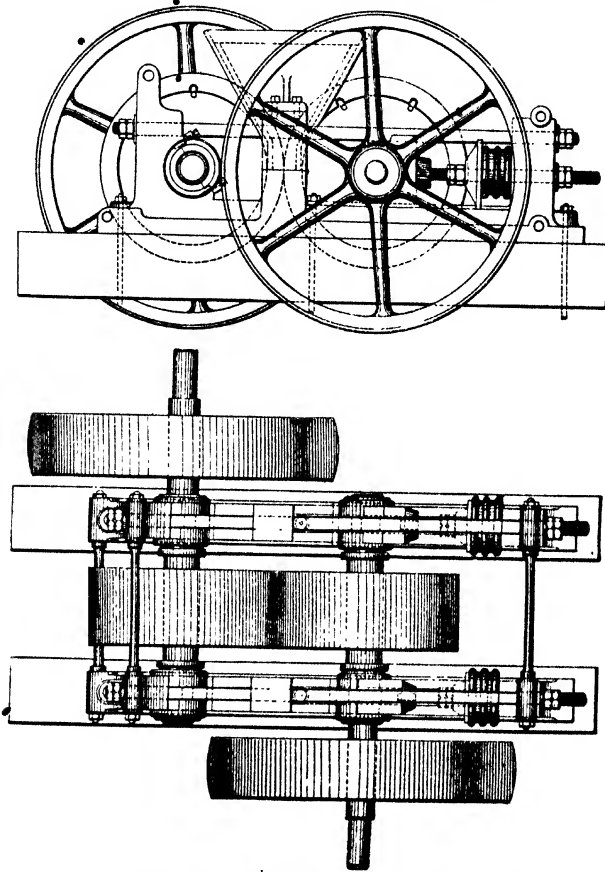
Belt-driven high-speed rolls. Elevation and Plan.
